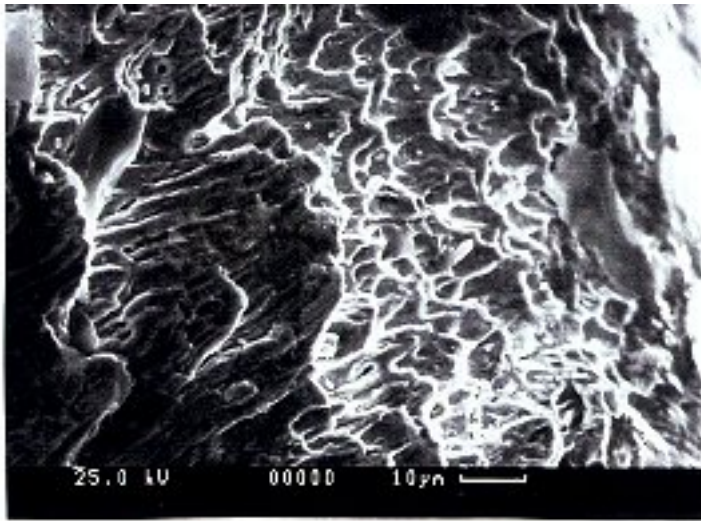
The SEM image shows the fracture surface of A1 in figure 9. The fracture surface is clean with sharp dimples, result by overstress.
